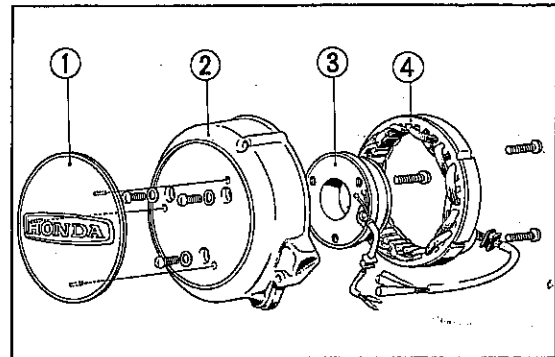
① Side cover ② Generator cover ③ Field coil ④ Stator coil
